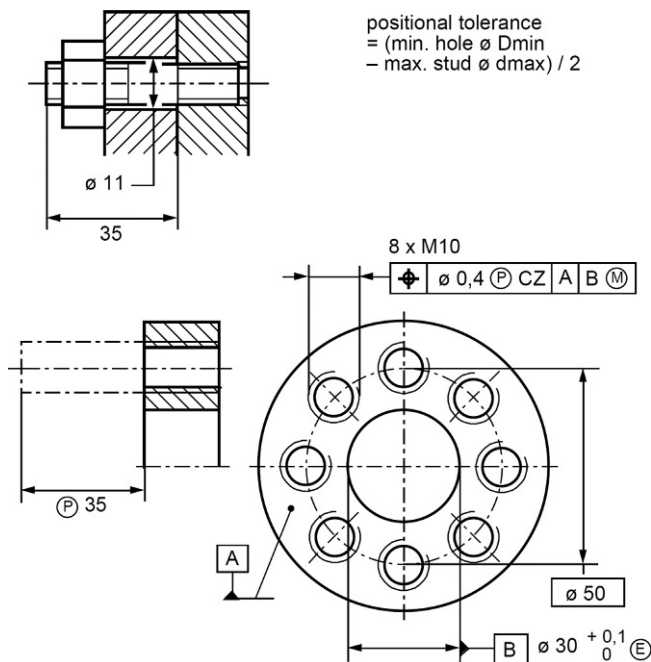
Threaded holes for fixed fasteners (stud screws and nuts)
